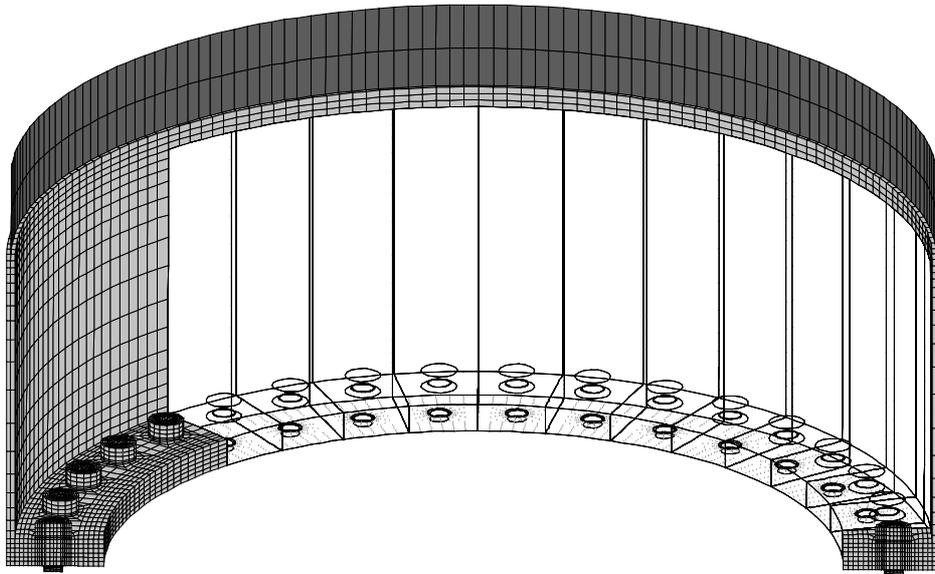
Example for a FE-model of a ring flange joint with superelements
